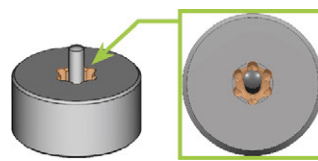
RECESS IN KNURLED NUT (MARKED ORANGE)
